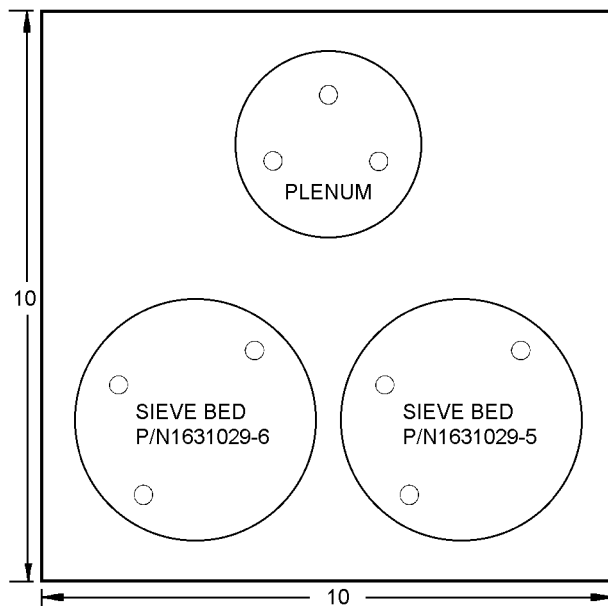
Peg Board for Plenum and Sieve Bed Spacers
